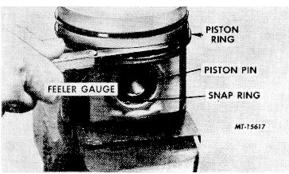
Checking Ring-to-Groove Side Clearance with Feeler Gauge
